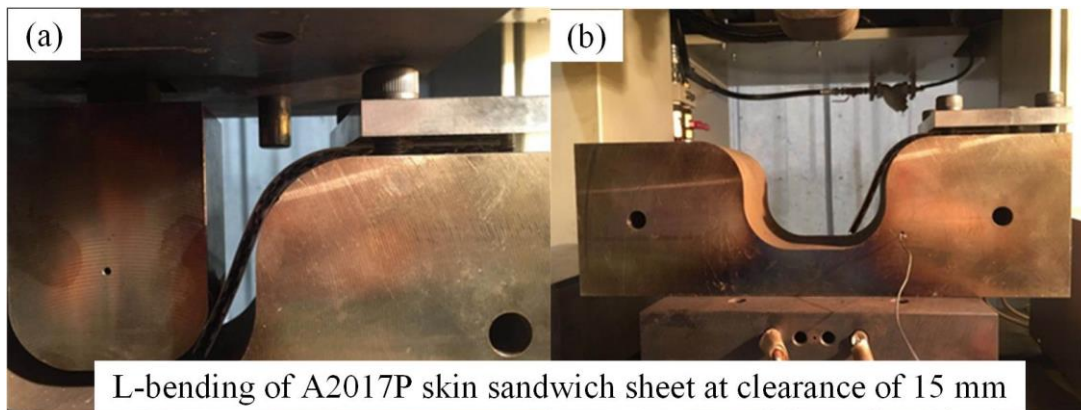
L-bending test of sandwich sheets with A2017P faces at clearance of 15 mm.
